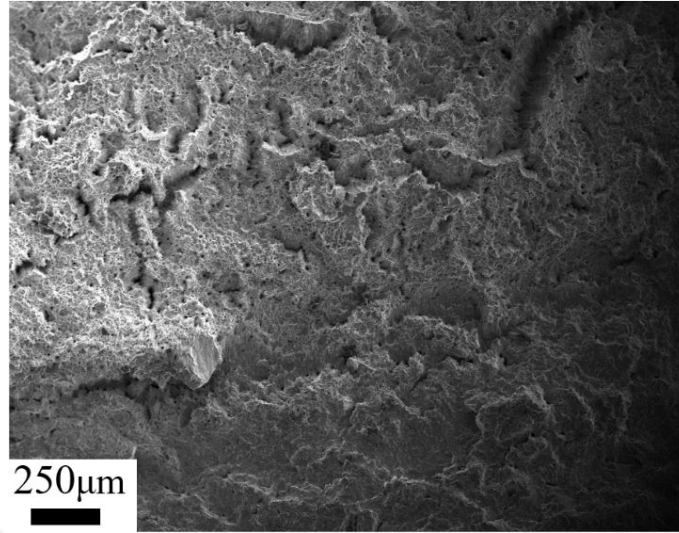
General view of the fatigue fracture surface of condition R 316L sample broken in 31.956 cycles, at 95% of σ_{yield} .
